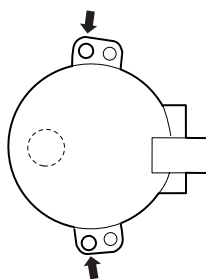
ROTARY MOTOR ASSEMBLY Removal
